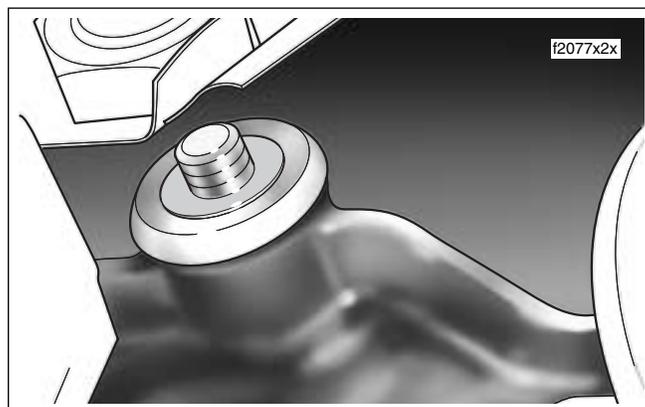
Remove Flat Washer and Upper Cup Washer (Right Side)
